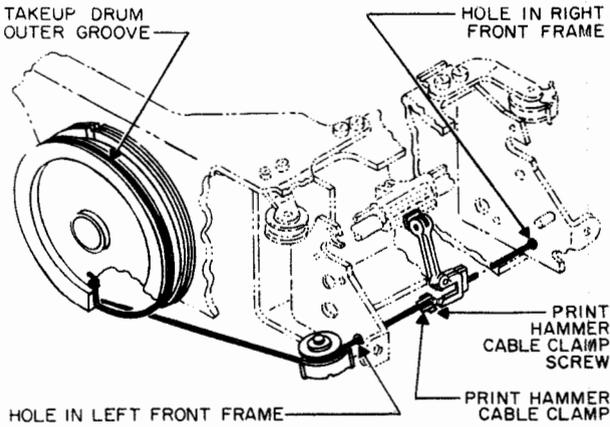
Print Hammer Cable Installation, Cable Threading Diagram
